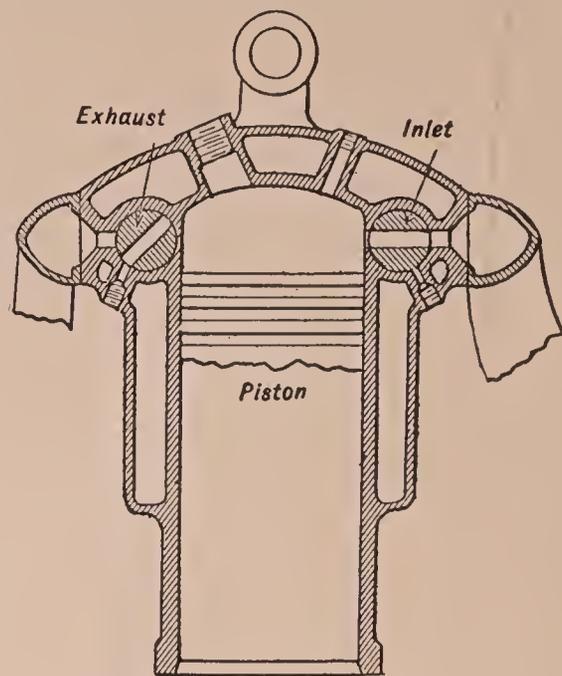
Sectional Sketch Through a Cylinder of the Mead Rotary Valve Engine, Indicating the Two Valves on Either Side of the Upper Part of the Cylinder Walls.
